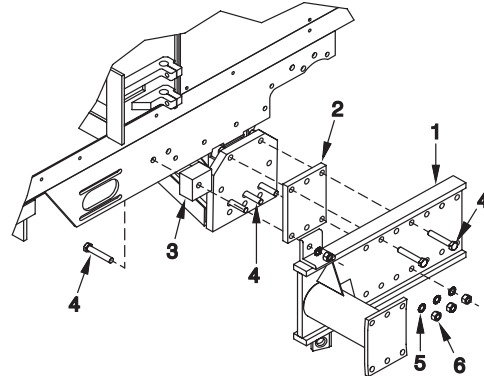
Mounting Tandem Plate and Spacers
